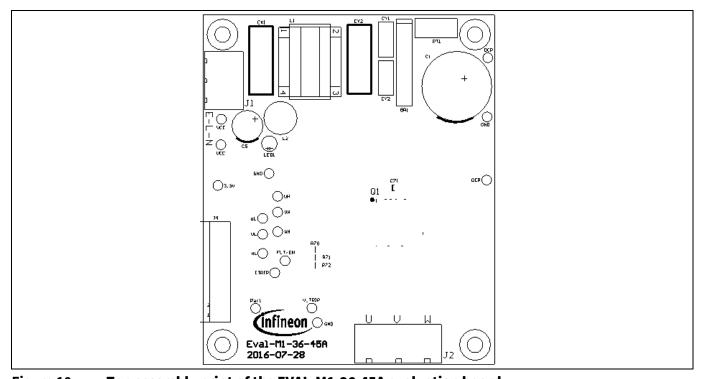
Top assembly print of the EVAL-M1-36-45A evaluation board
